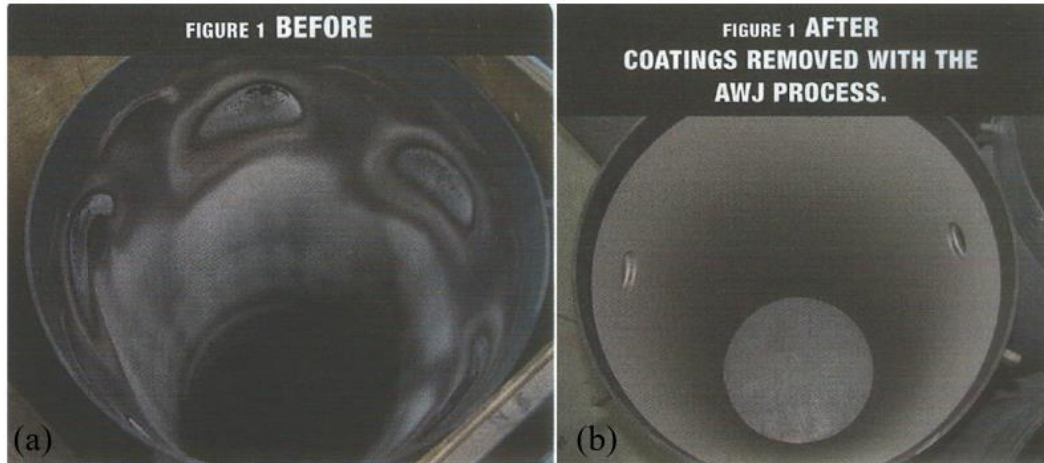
Turbine component coating before and after removal AWJ process [39].
